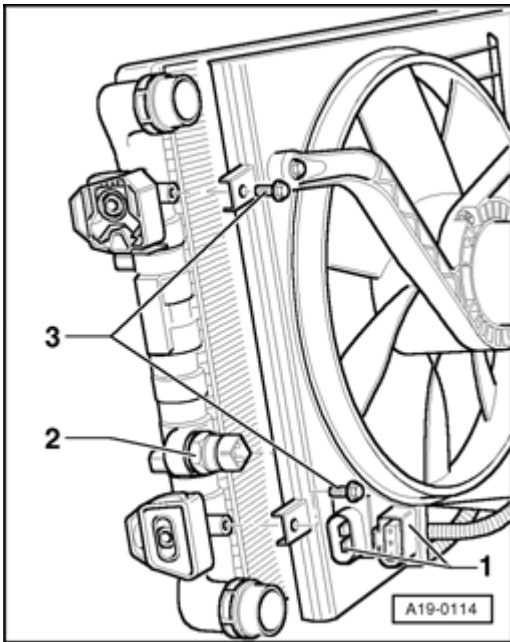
Identifying Radiator Fan Cowl Connectors, Coolant Fan Control (FC) Thermal Switch -F18- Connectors & Radiator Cowl
